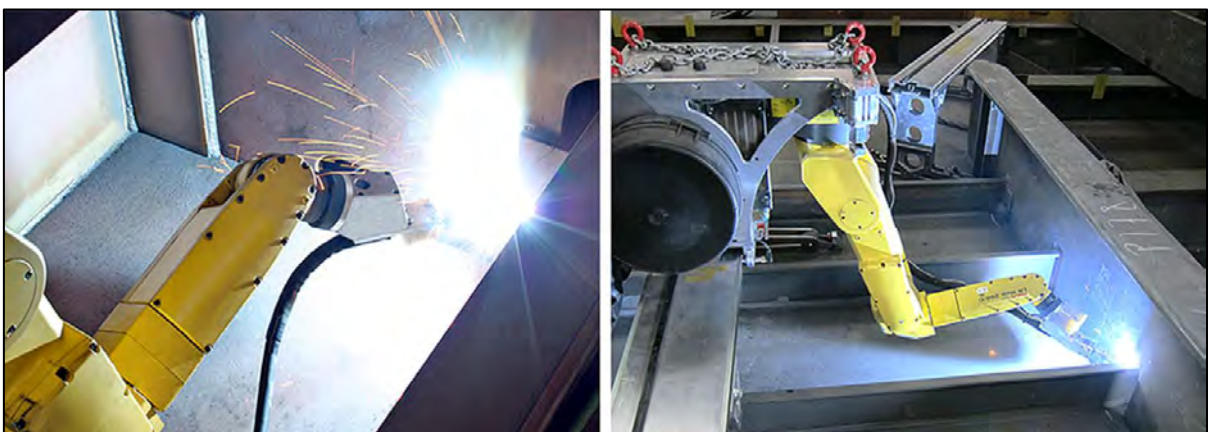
Robotic welding between webs, stiffeners and deck plate. The robot identifies the structure itself and welds automatically
